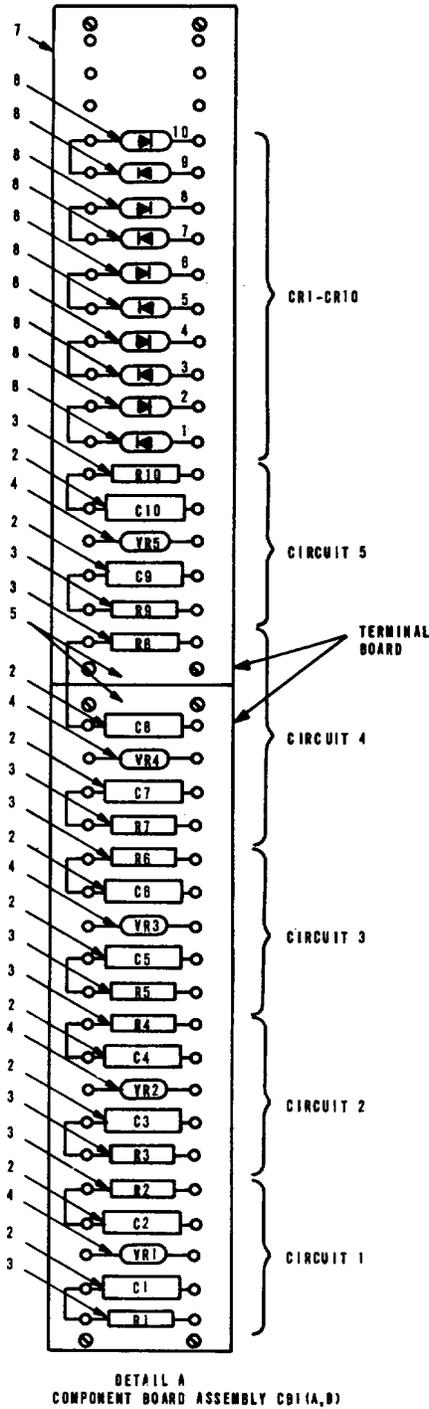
Speaker amplifier assembly 41030-01, parts location.
